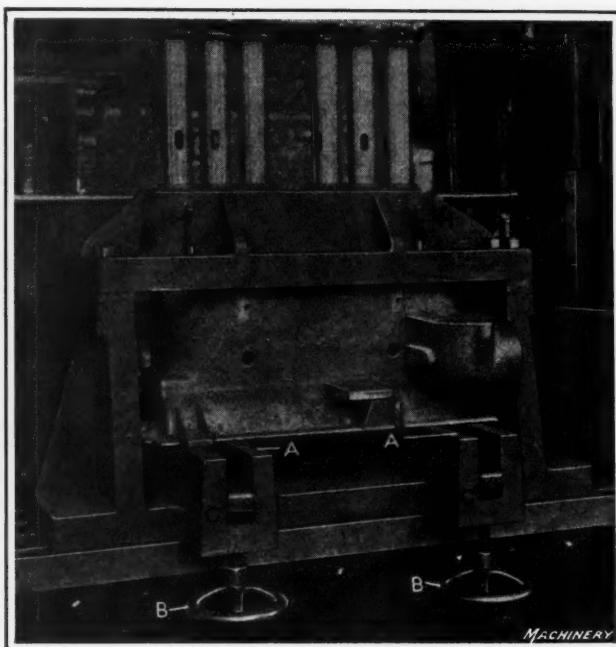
Method of setting up Cylinder Blocks for boring perpendicular to Head End
